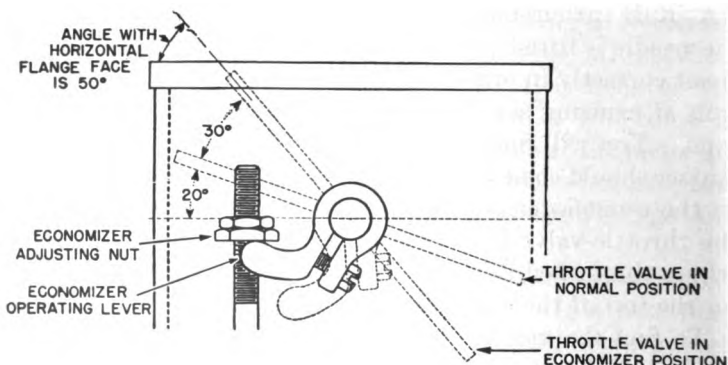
Method of measuring angle at which economizer comes in on NA-R9C2 carburetor.
